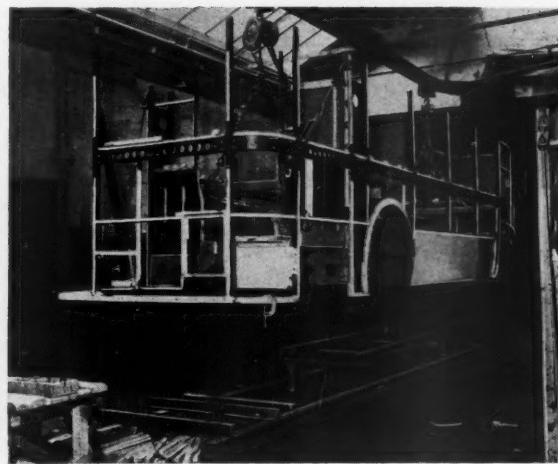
The end of the lower saloon assembly line, with an assembly ready for mounting on the chassis.
